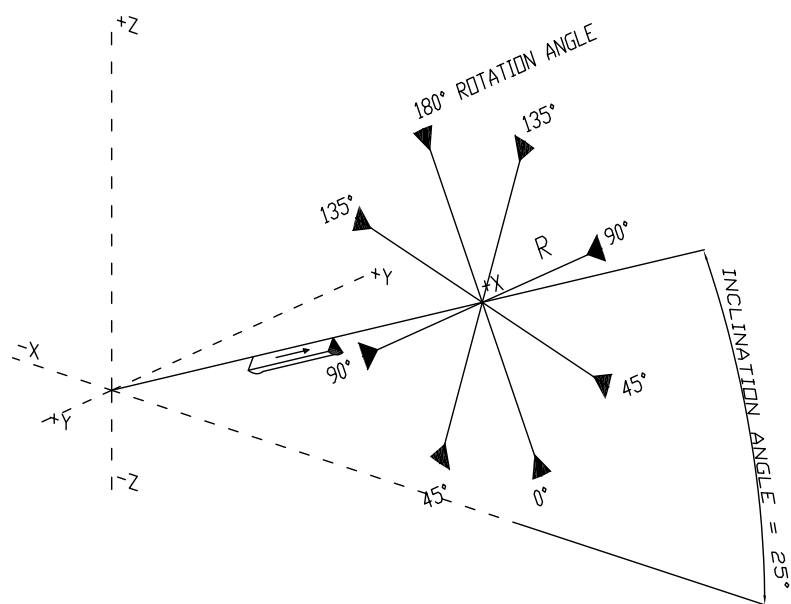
Combination of the β angle and the γ angle of welds in a 3D view
